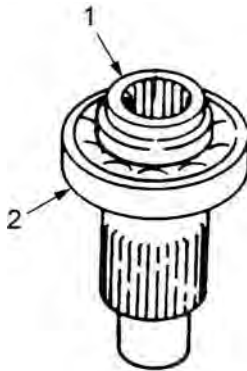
Retaining Bearing Assembly Installation on Output Shaft.
